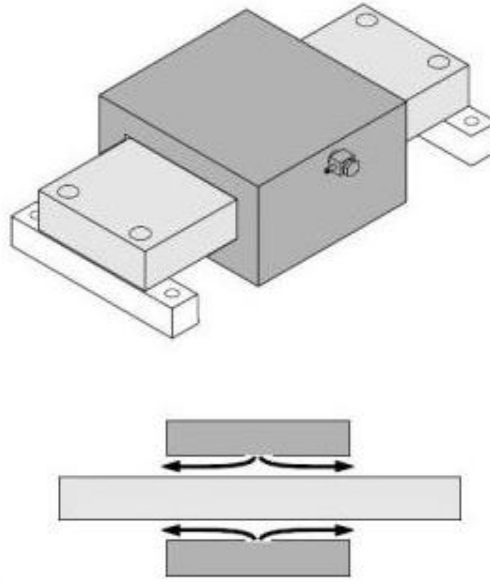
Air bearing (Top: ISO view; Bottom: Cross section) [39].
